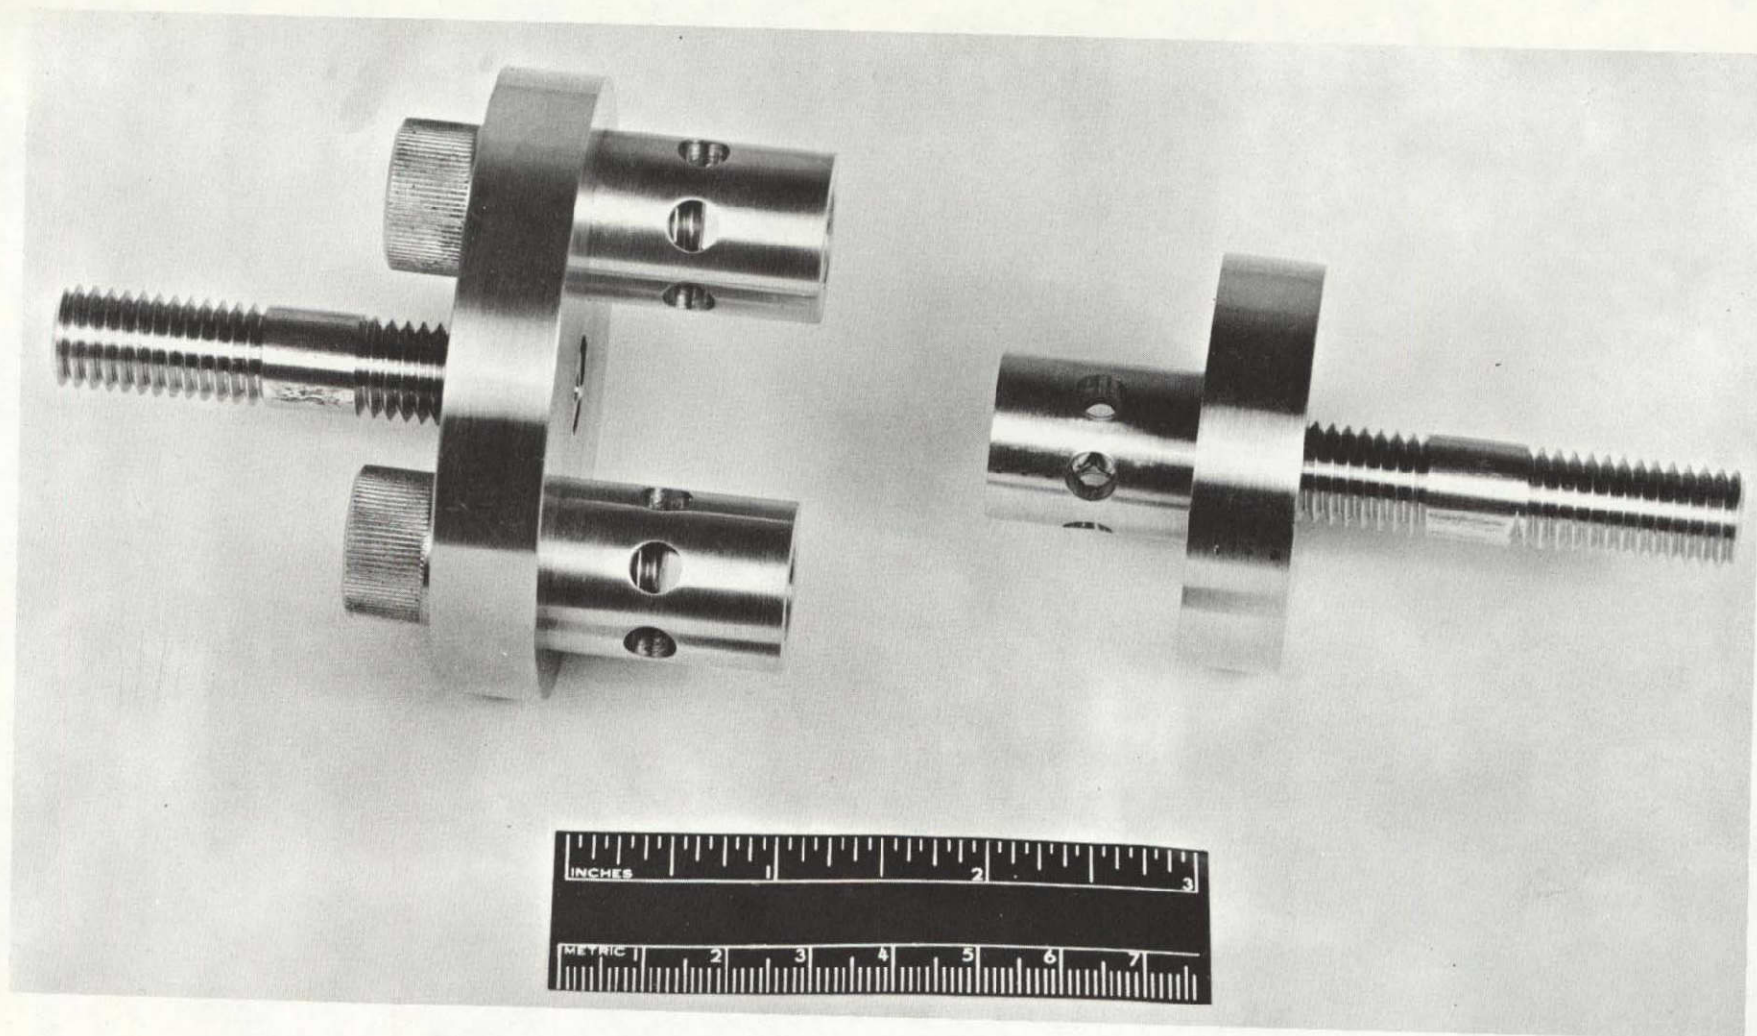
Stainless Steel Adaptors for Mechanical Testing of GTA Tube-to-Tube Weld Specimens.
